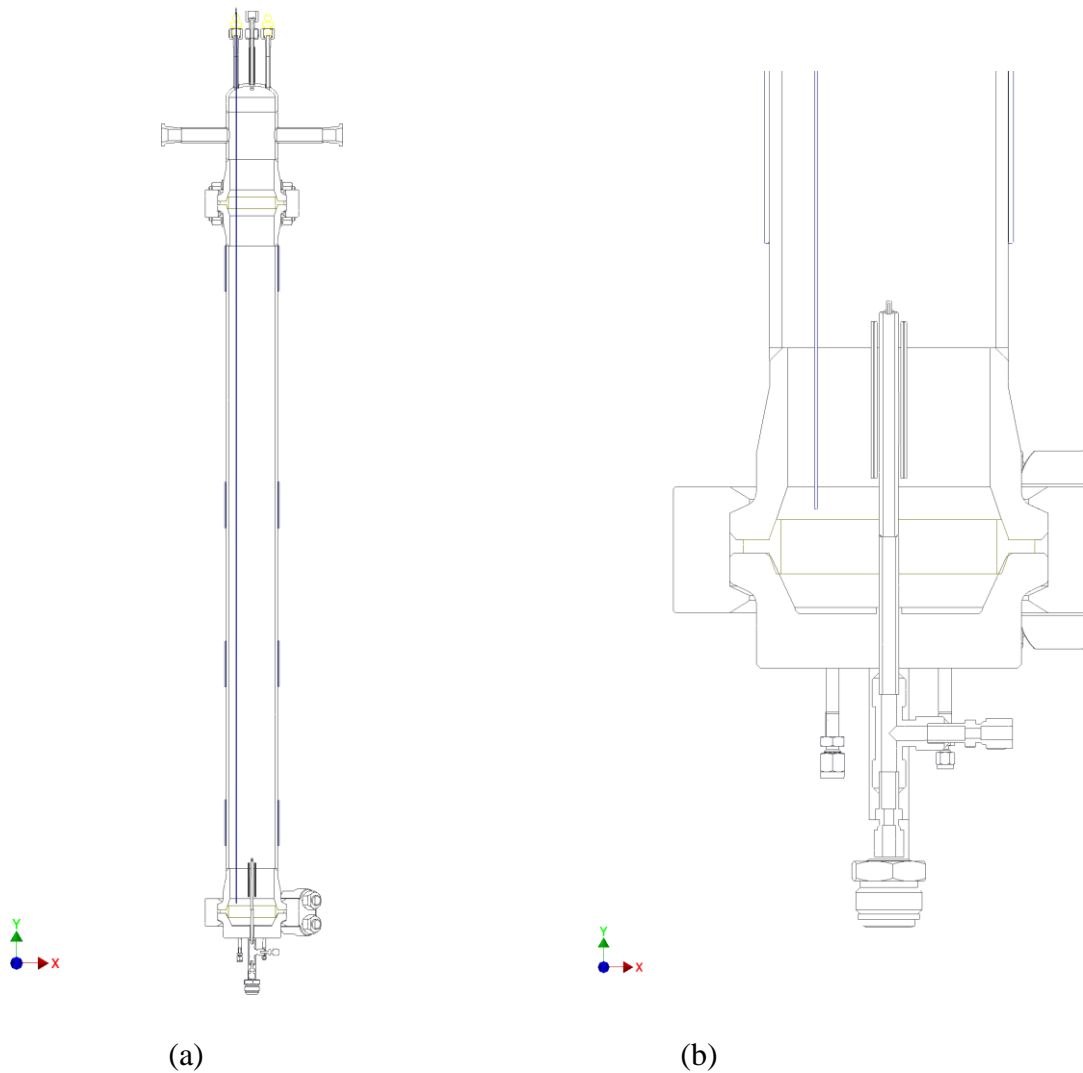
Drawing of Exp2018_16 test vessel and injection assembly. (a) full drawing and (b) section drawing of injector.
